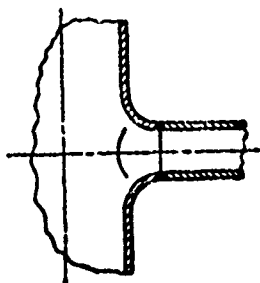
Welding pipe drains to the main pipe.
